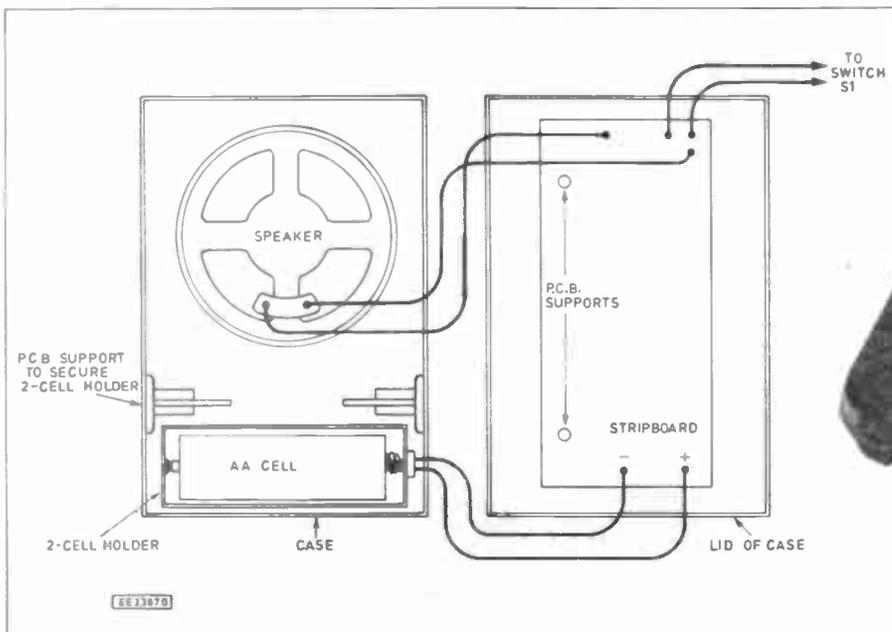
Layout of components inside the case and interwiring from the circuit board to all off-board components.
